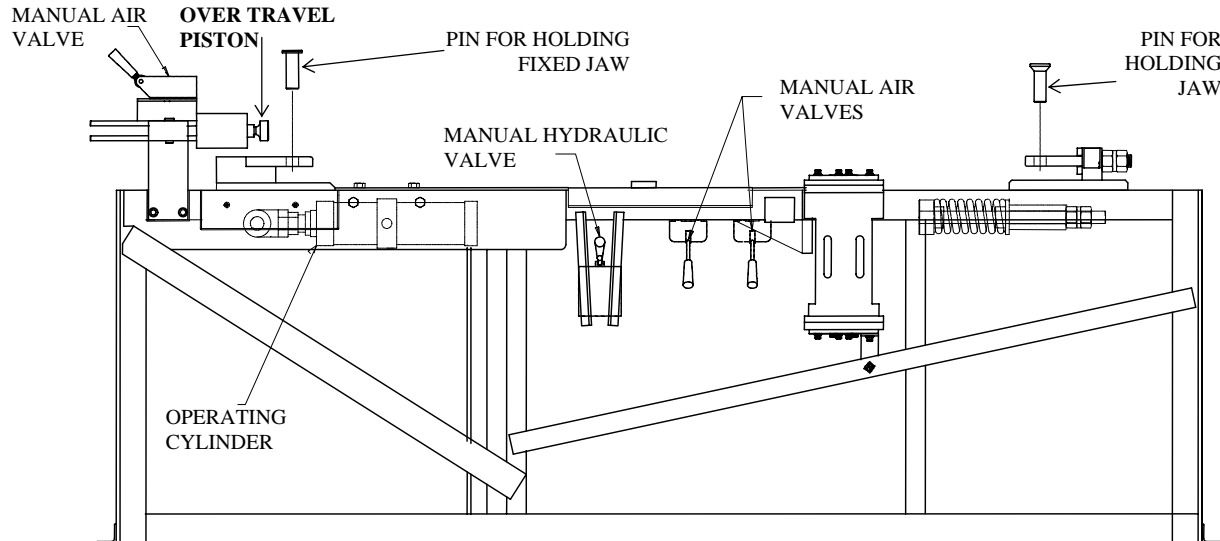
2000-DJ Slack Adjuster Test Fixture
